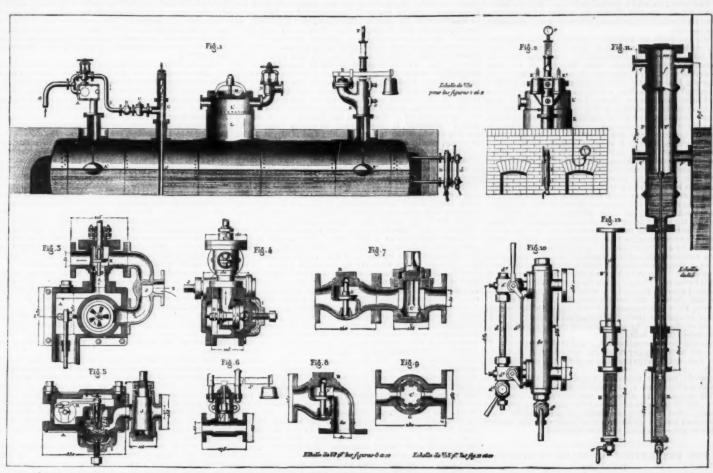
Feed Apparatus; Stop Valve; Indicator. Fig. 2.—Indicator. Figs. 3 to 6.—Regulator Figs. 7 to 9.—Check Valve and Cock. Fig. 10.—Tubular Water Gauge. Figs. 11 and 12.—Indicator.
